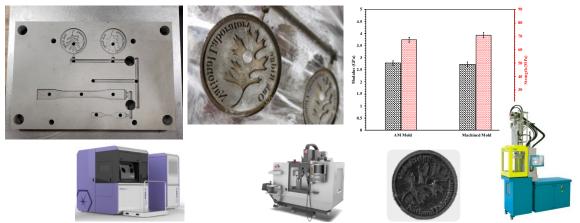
shows one face of the conformally cooled injection molding tool, machined surface, and properties of injection molded material from the AM tool compared to a conventionally machined tool
